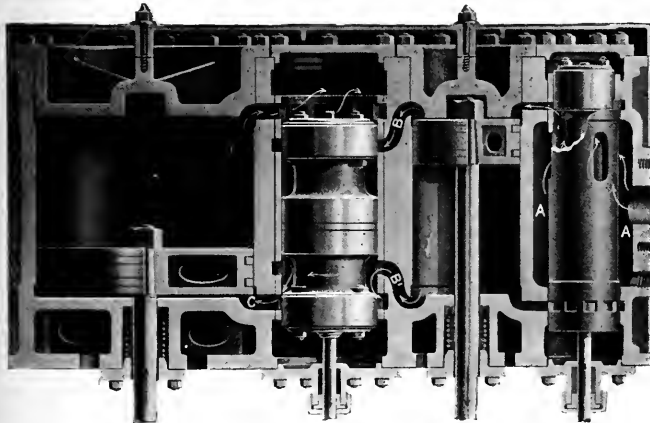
CROSS-SECTIONAL VIEW OF ENGINE CYLINDERS.
